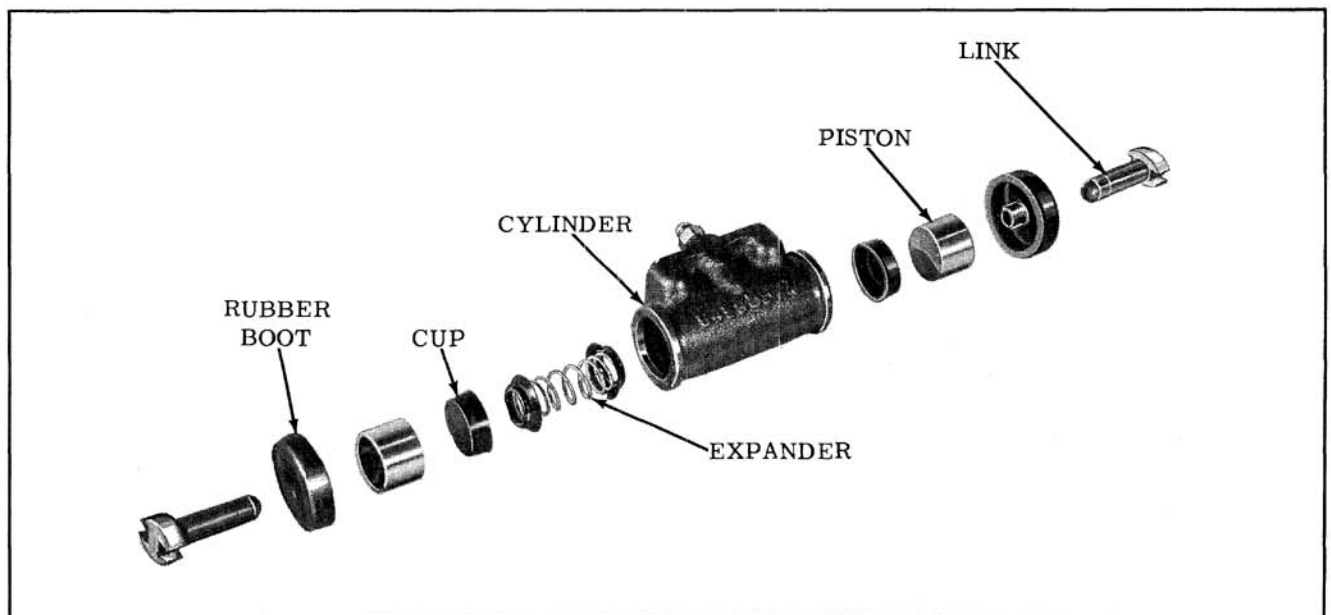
Wheel Cylinder (33 through 38 Series)
